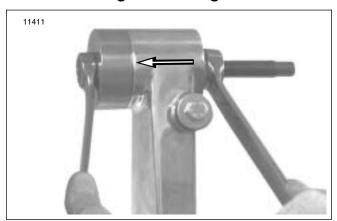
Remove Left Side Swingarm Bearing (typical)
